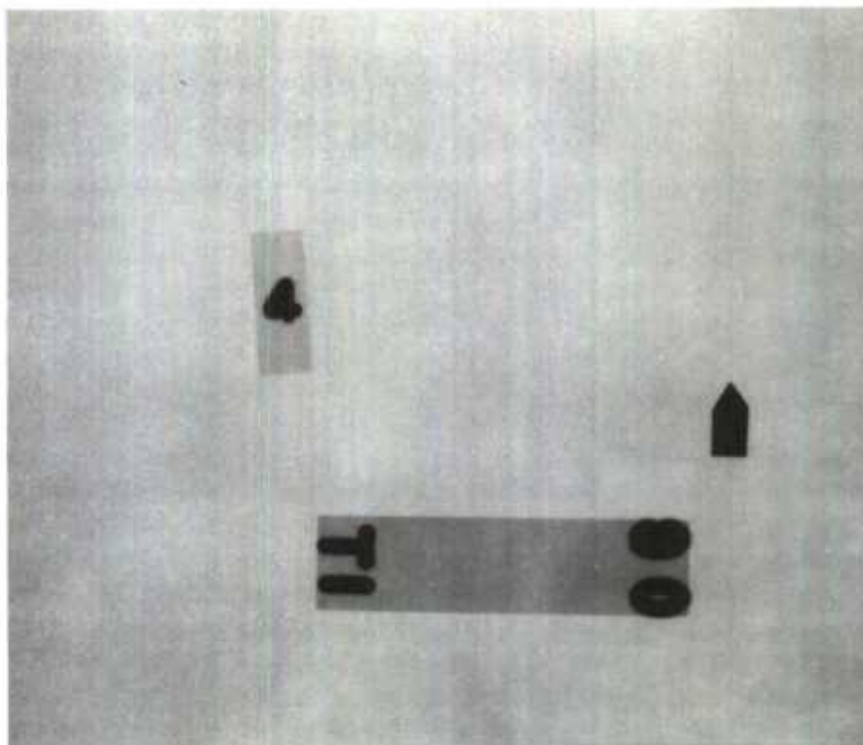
Radiograph of Fusion Welded Fatigue Specimen
